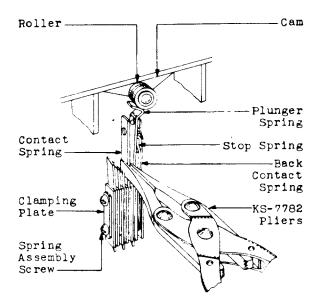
Method of Adjusting for Contact Separation, Spring Clearance, Contact Pressure, Other Spring Pressures, Contact Follow, Contact Sequence, and Nonclick
